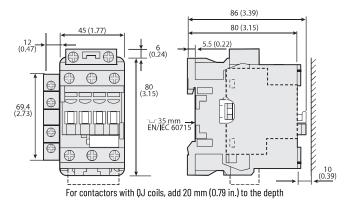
100-E26...100-E38 4-Pole Contactors with Standard Coils and Side-mounted Auxiliary Contact
